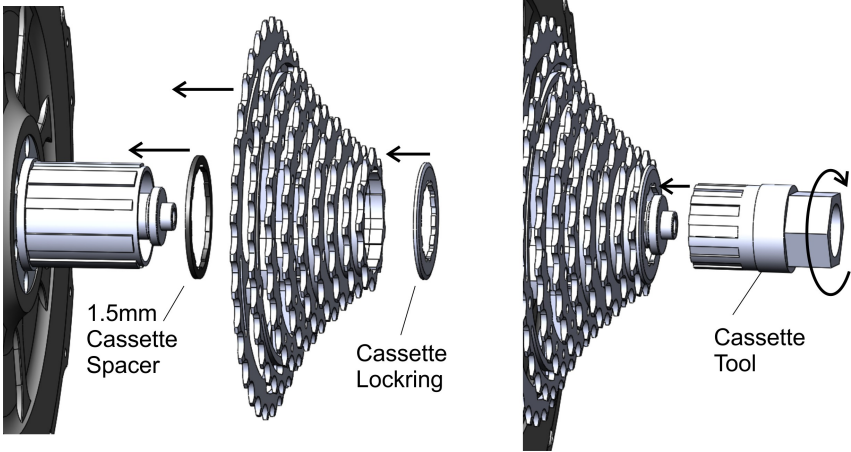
A 1.5mm spacer is required behind mountain cassettes, but should be left out with the wider road cassettes. A bicycle cassette tool is required to tighten locking.
